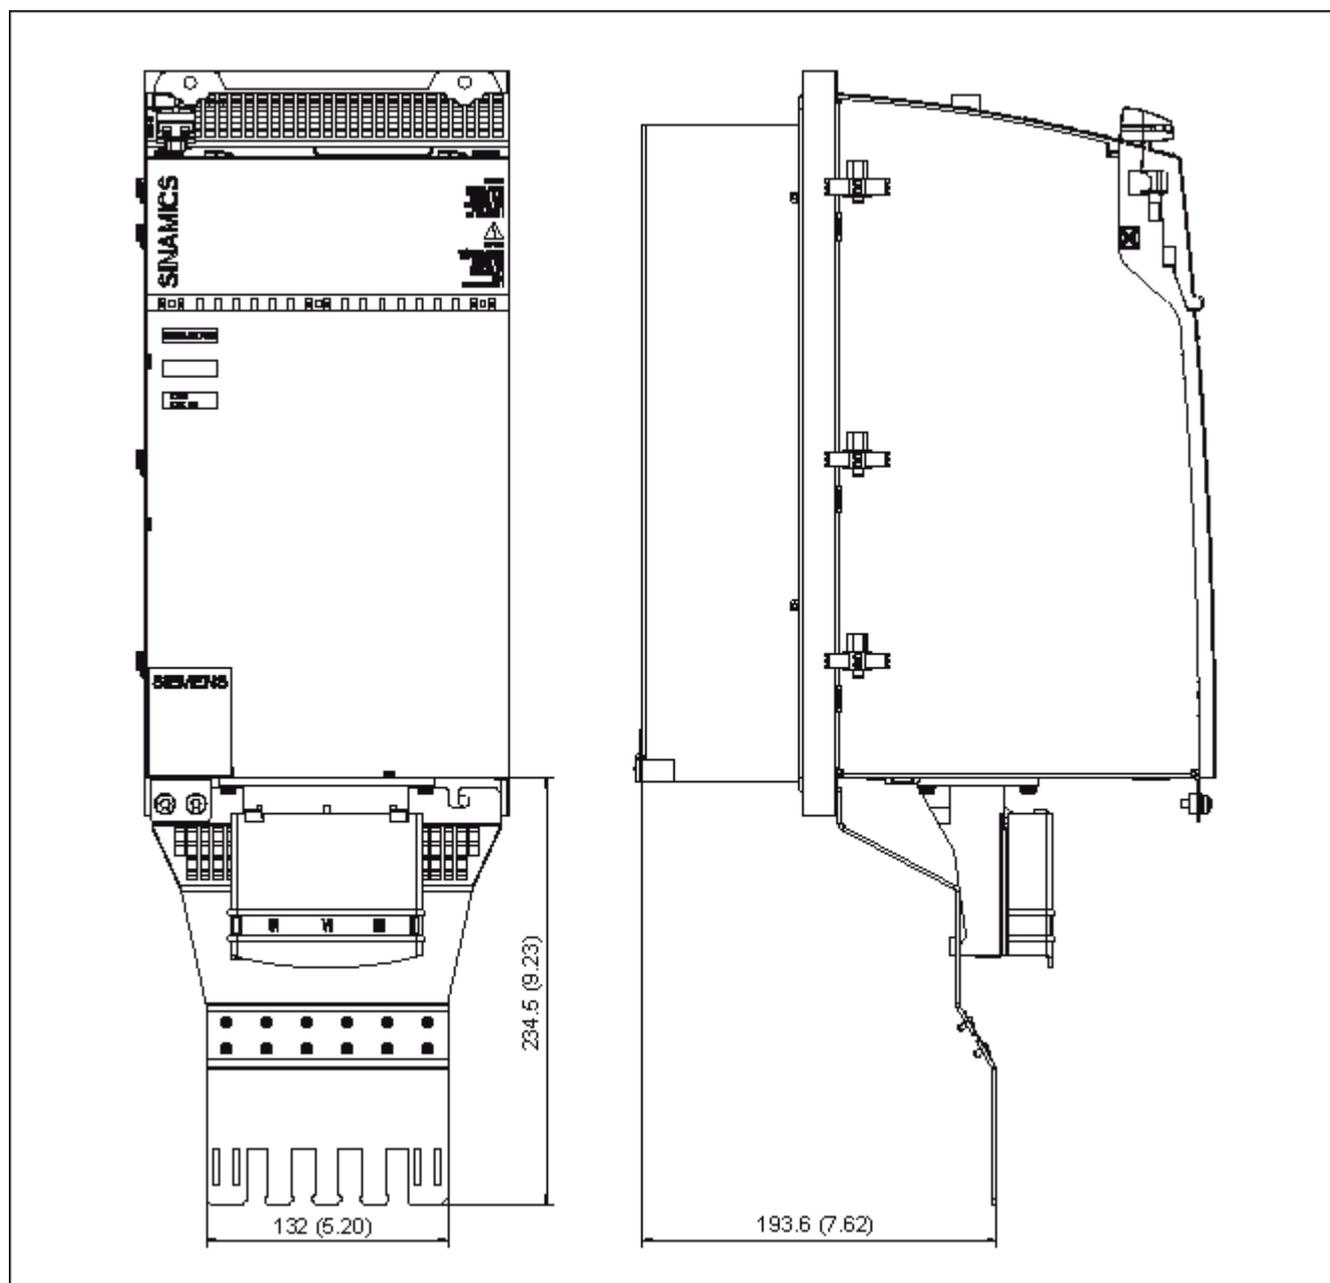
Dimension drawing of shield connecting plate on a 200 mm component with external air cooling, all dimensions in mm and (inches)
